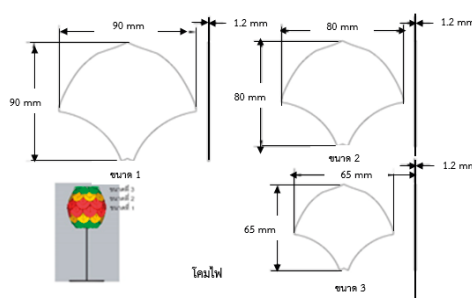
The design of the assembly part Lamp made from pineapple fiber sheets
